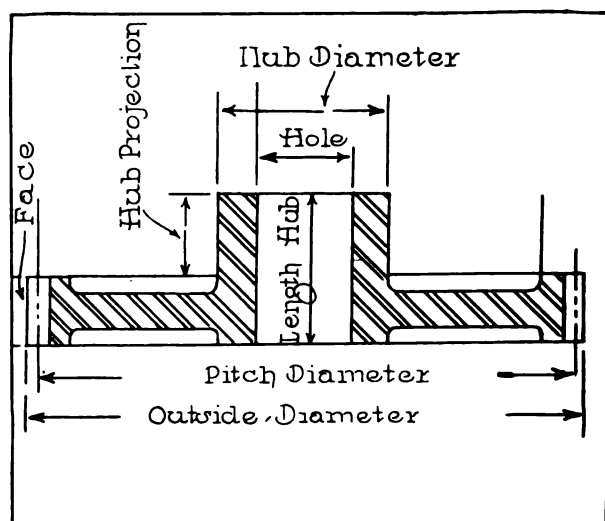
Measurements to Be Considered in Utilizing Spur Gears of Involute Form.
